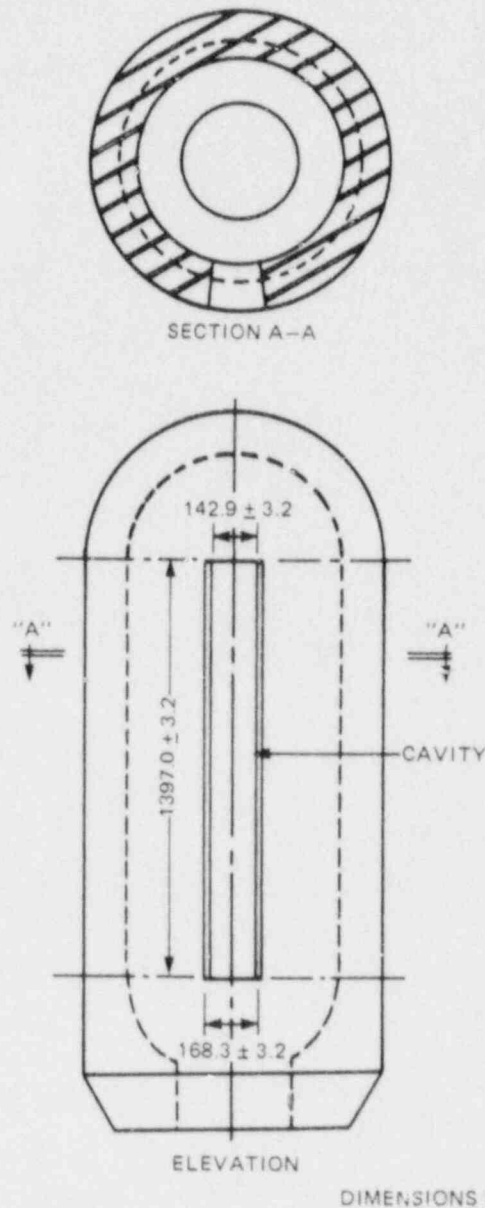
Intermediate test vessel V-8 cavity dimensions.
